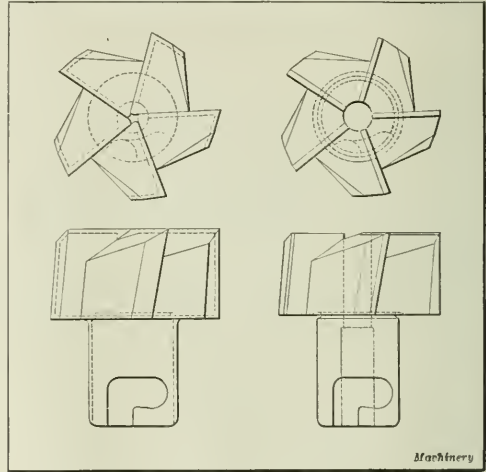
End-mill Forging, produced on the Power Press within 1/16 Inch of Required Size
